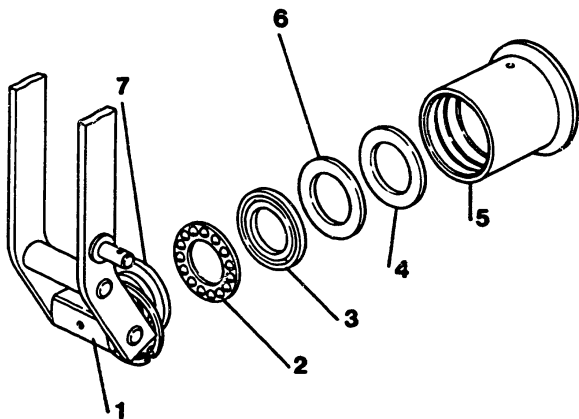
Sleeve, guide lever assembly and bearing assembly
